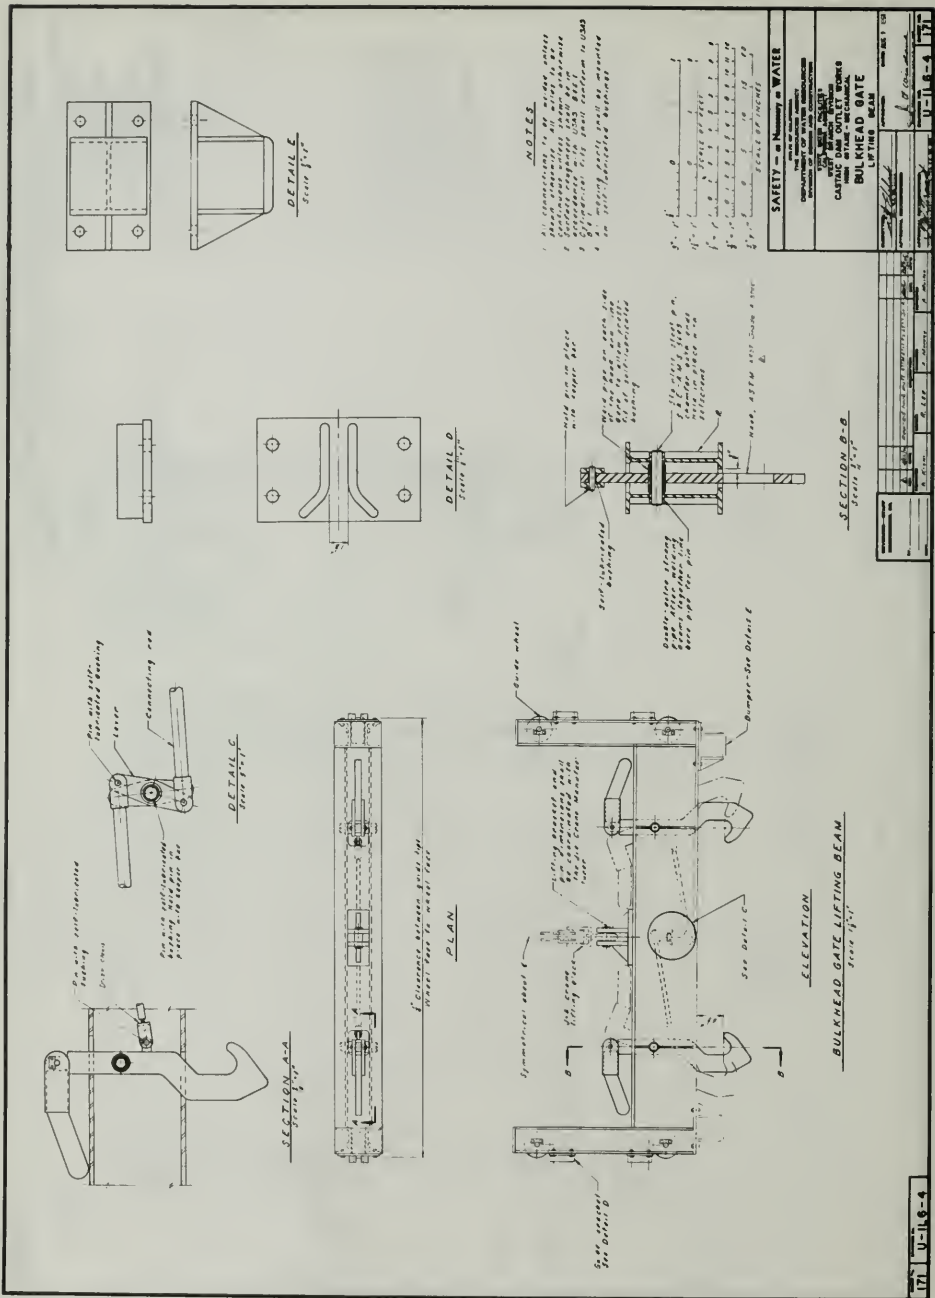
General Arrangement of Bulkhead Gate and Lifting Beam
